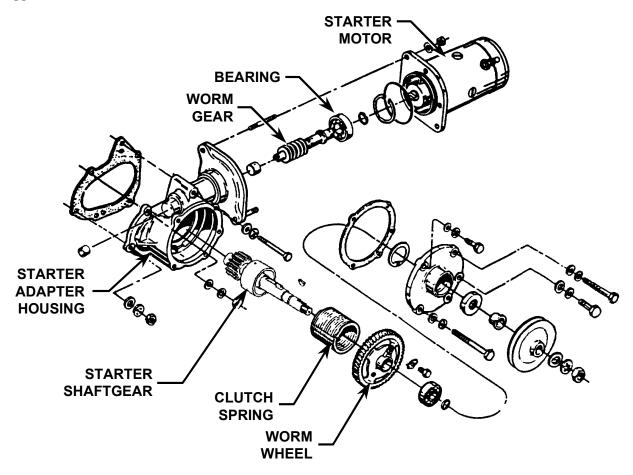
Sandcast Series Starter Adapter Exploded View
